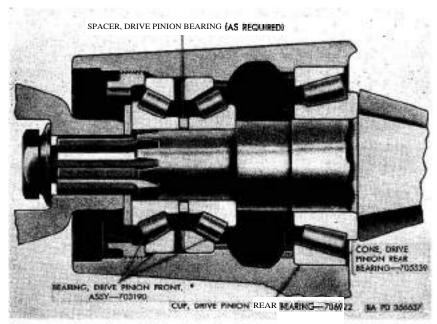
Location of drive pinion bearing spacer for checking preload of rear bearing and front bearing outer cone.
